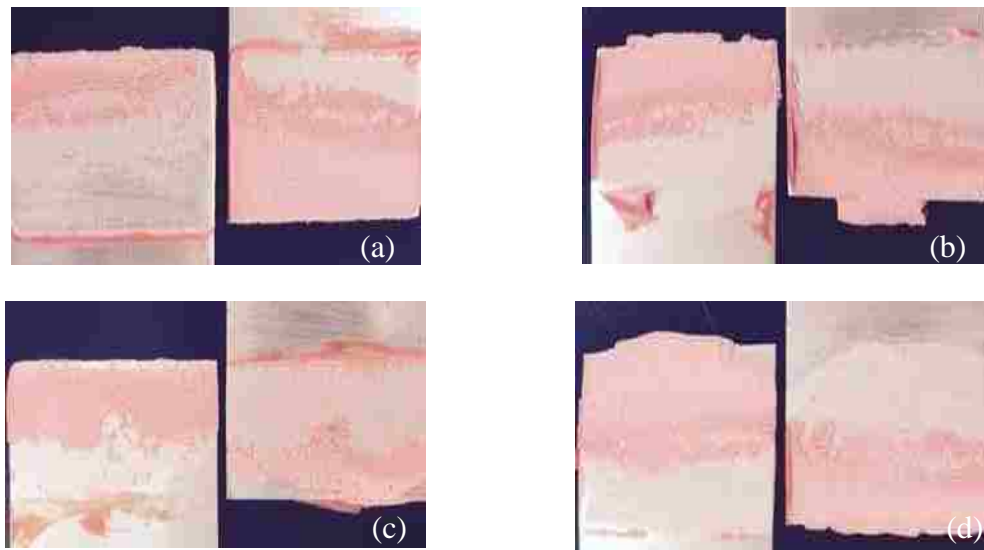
Fractured specimen for 2.1mm adherend thickness, adhesive thickness=0.25mm, surface roughness obtained through p240 sand paper for different test speed values; (a) $v=0.1$ mm/min b) $v=2$ mm/min c) $v=5$ mm/min d) $v=100$ mm/min
